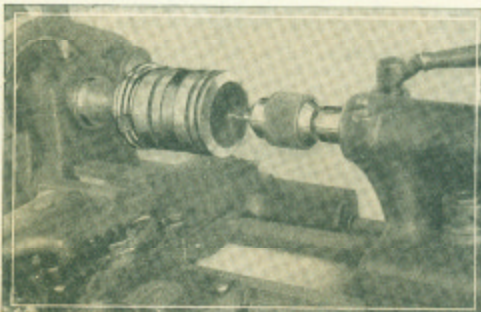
Piston Mounted in Lathe for Drilling Center Hole in Head
